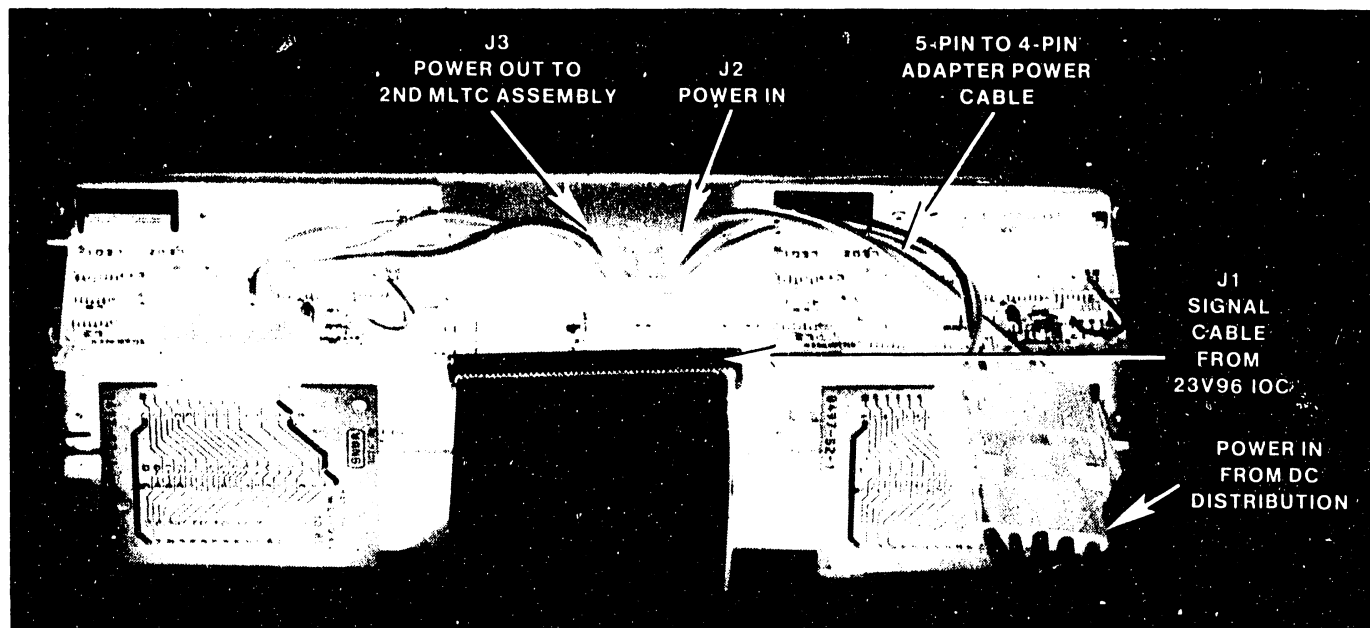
270-1003 Multiline TC Back Panel Assembly with Cabling
